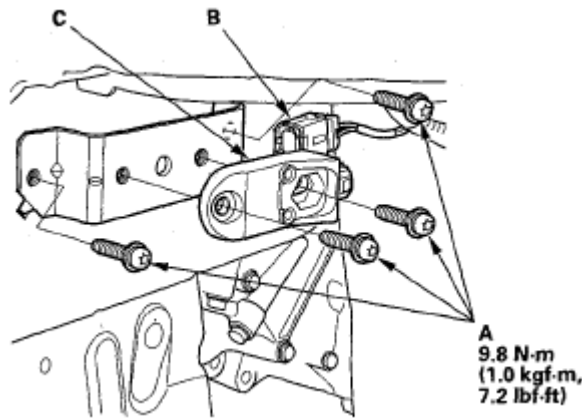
Identifying Engine Compartment Wire Harness 2P Connector And Front Impact Sensor
